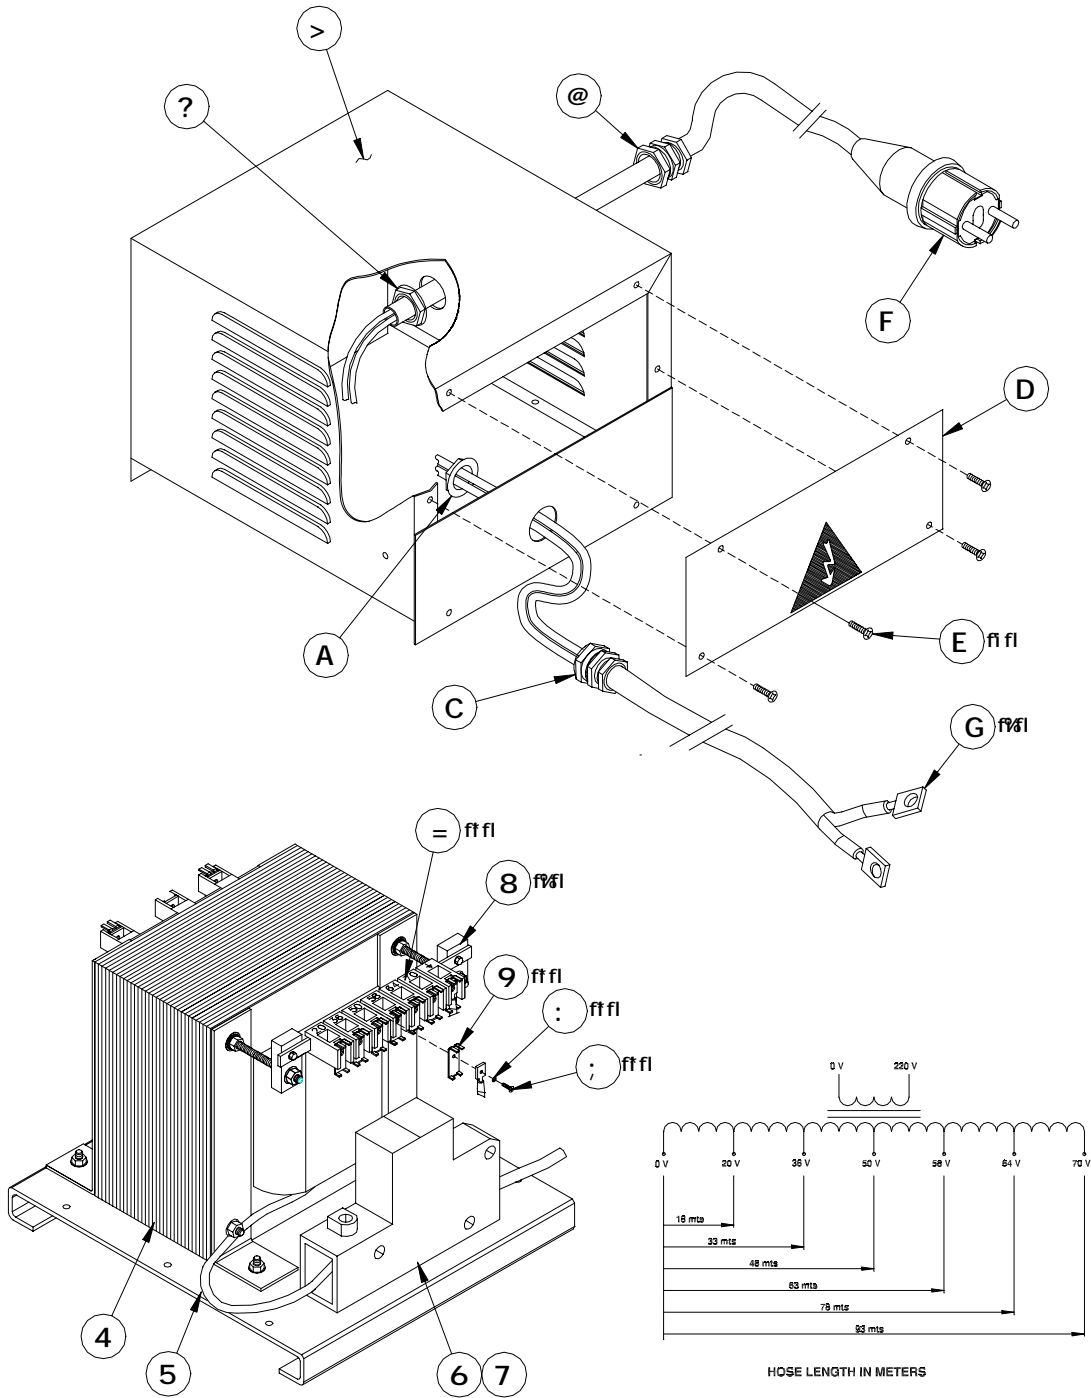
Auto Power Pack (Part No. 57276E), Exploded View
